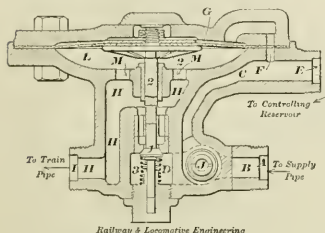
VALVE FOR TRIPLE VALVE TESTING DEVICE.
